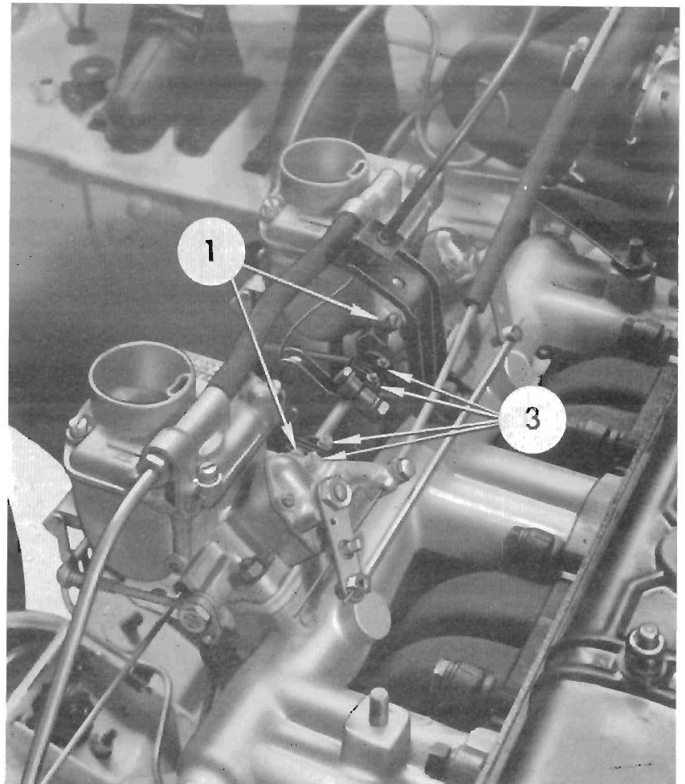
L.H. view of carburettors, showing flexible linkage clamping bolts (3) and throttle stop screws (1)
